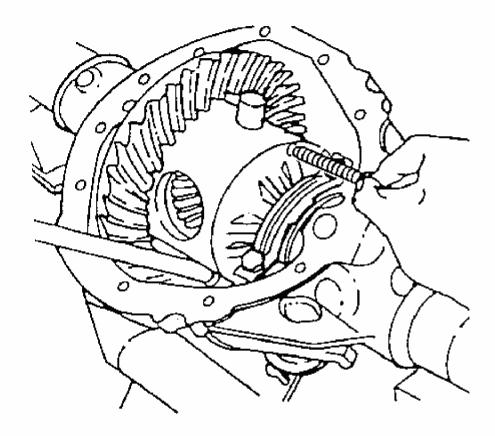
View Of Pinion Shaft Locking Bolt Courtesy of GENERAL MOTORS CORP.
